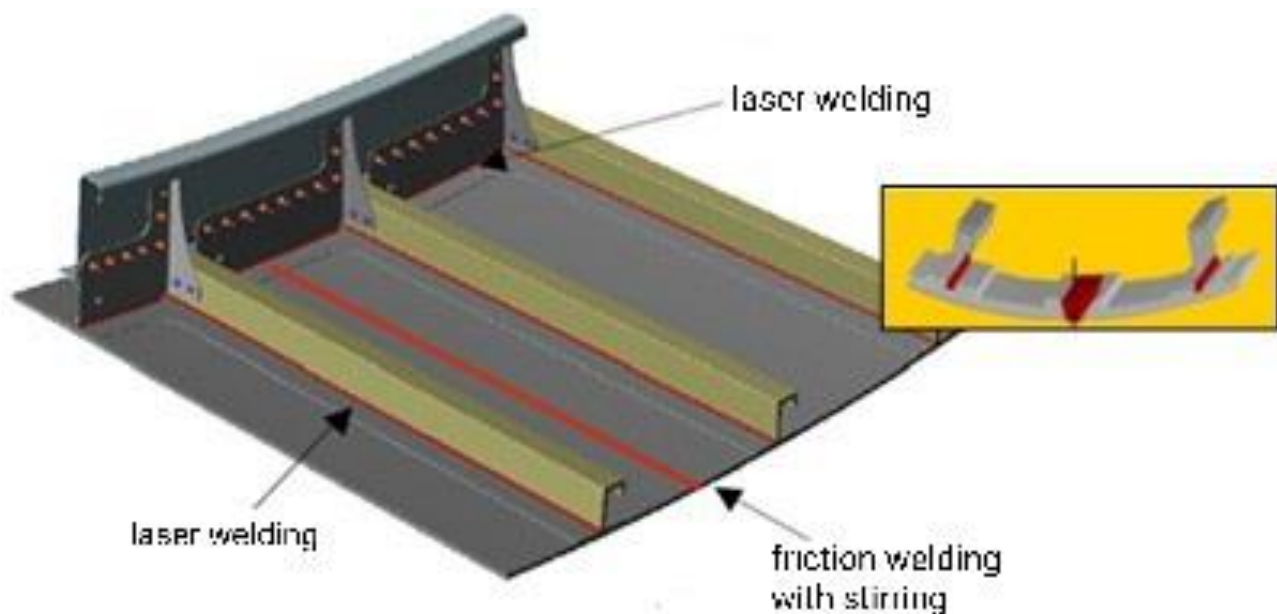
A variant of manufacturing a welded fuselage panel
